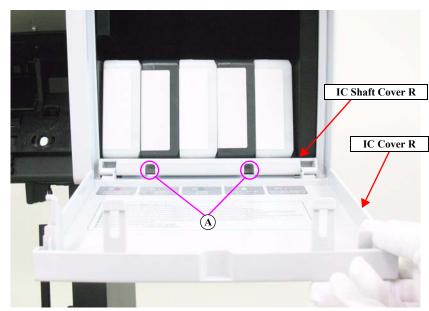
Removing the IC Cover (L/R) & IC Shaft Cover (L/R)
